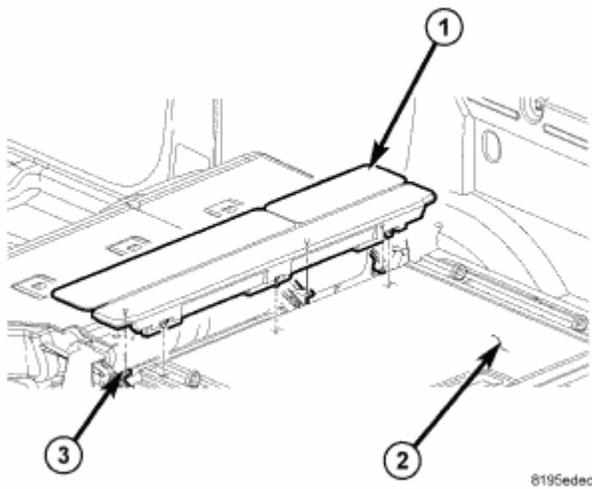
Load Floor Panel, Load Floor & Rear Seat Bracket
